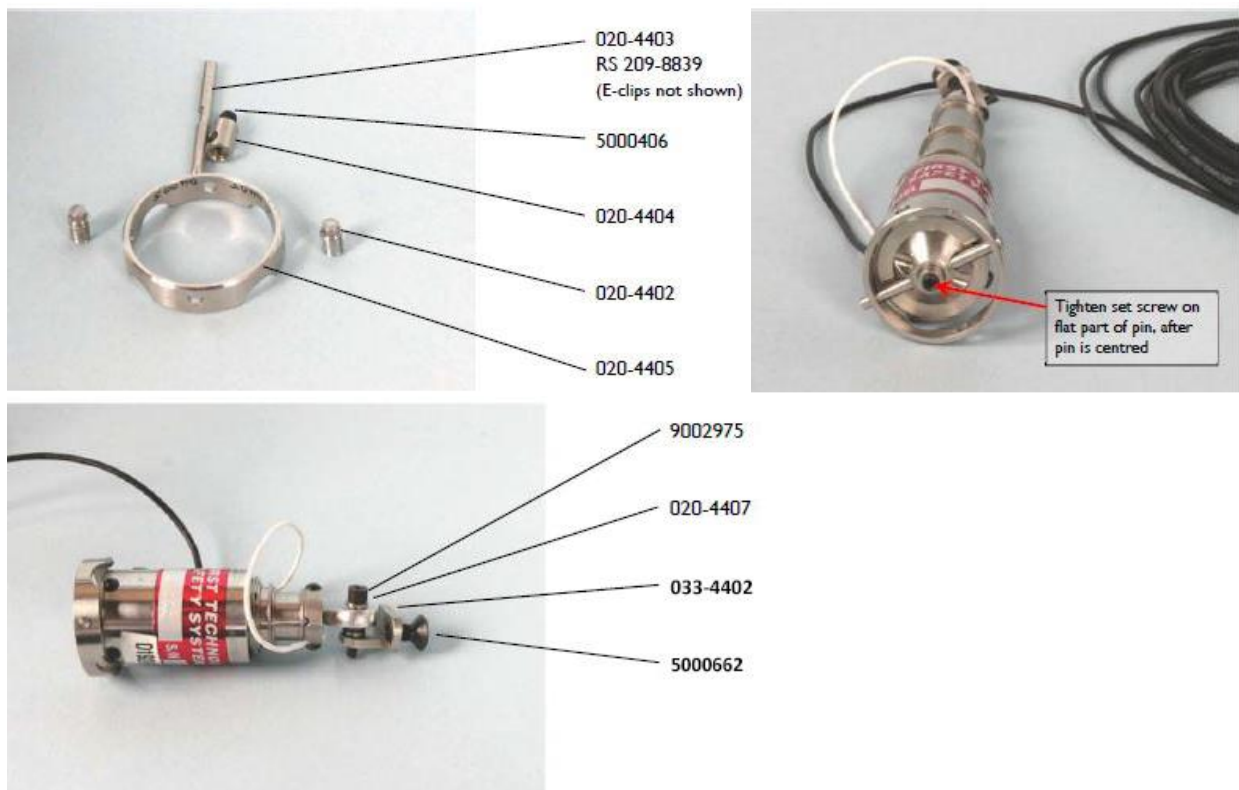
IR-TRACC attachment hardware spine frontal (top left and right) and rib cage side (bottom)
